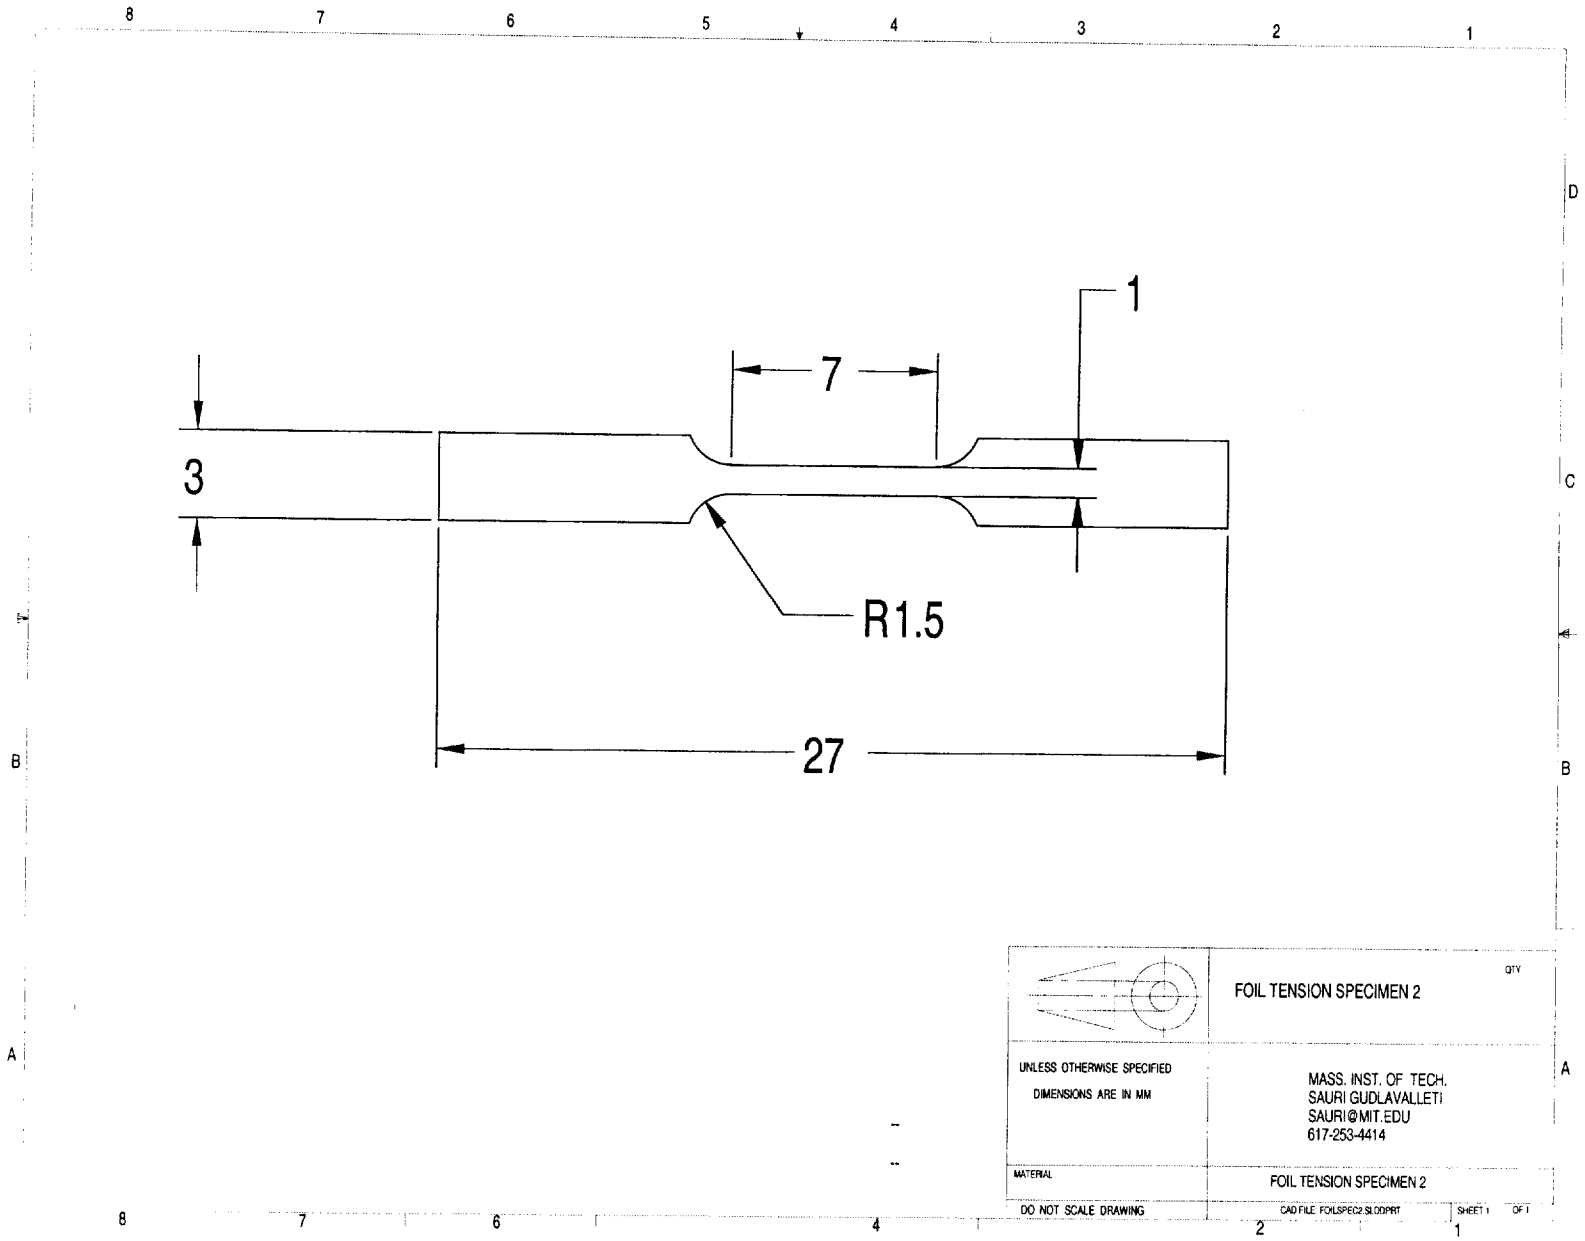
Engineering drawing of modified foil tension specimen. All current grips and fixtures are made for this geometry.
